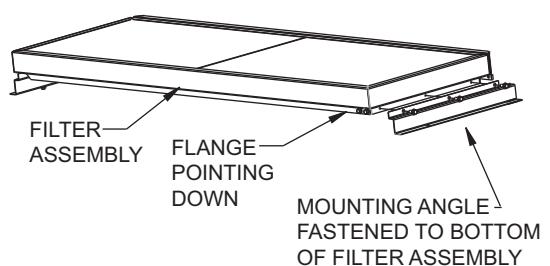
Correctly Assembled Bottom Filter Assembly, Sizes 020-035 Only
